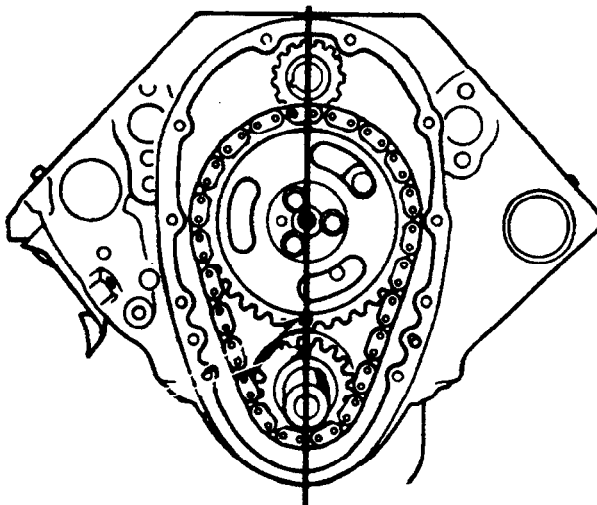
Camshaft-to-Crankshaft Timing Marks
